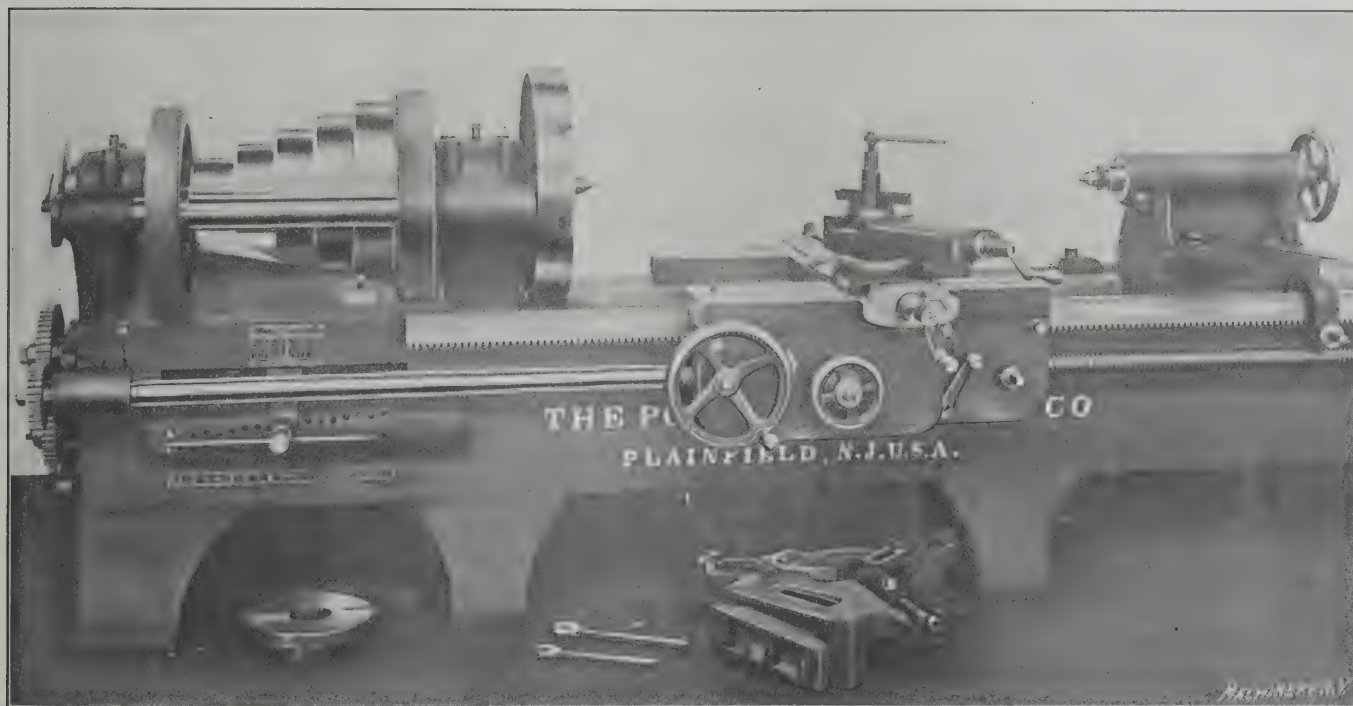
Twenty-four-inch Engine Lathe with Quick-change Gear Device
